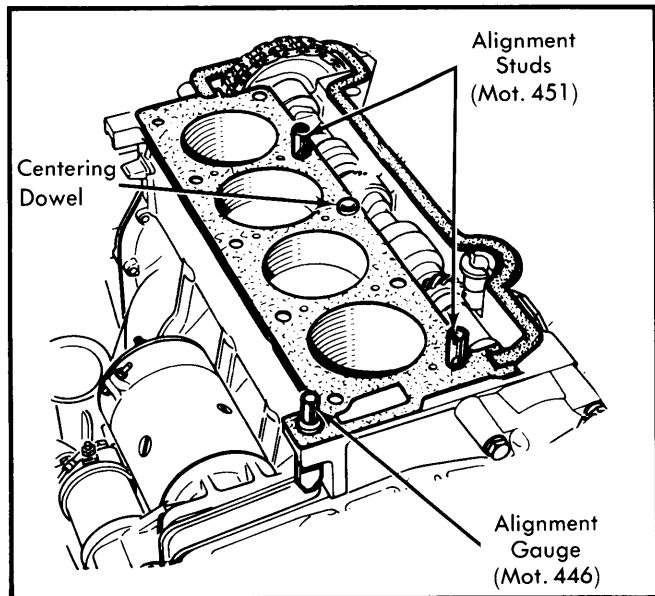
Alignment Gauge, Studs and Centering Dowel Positioning
